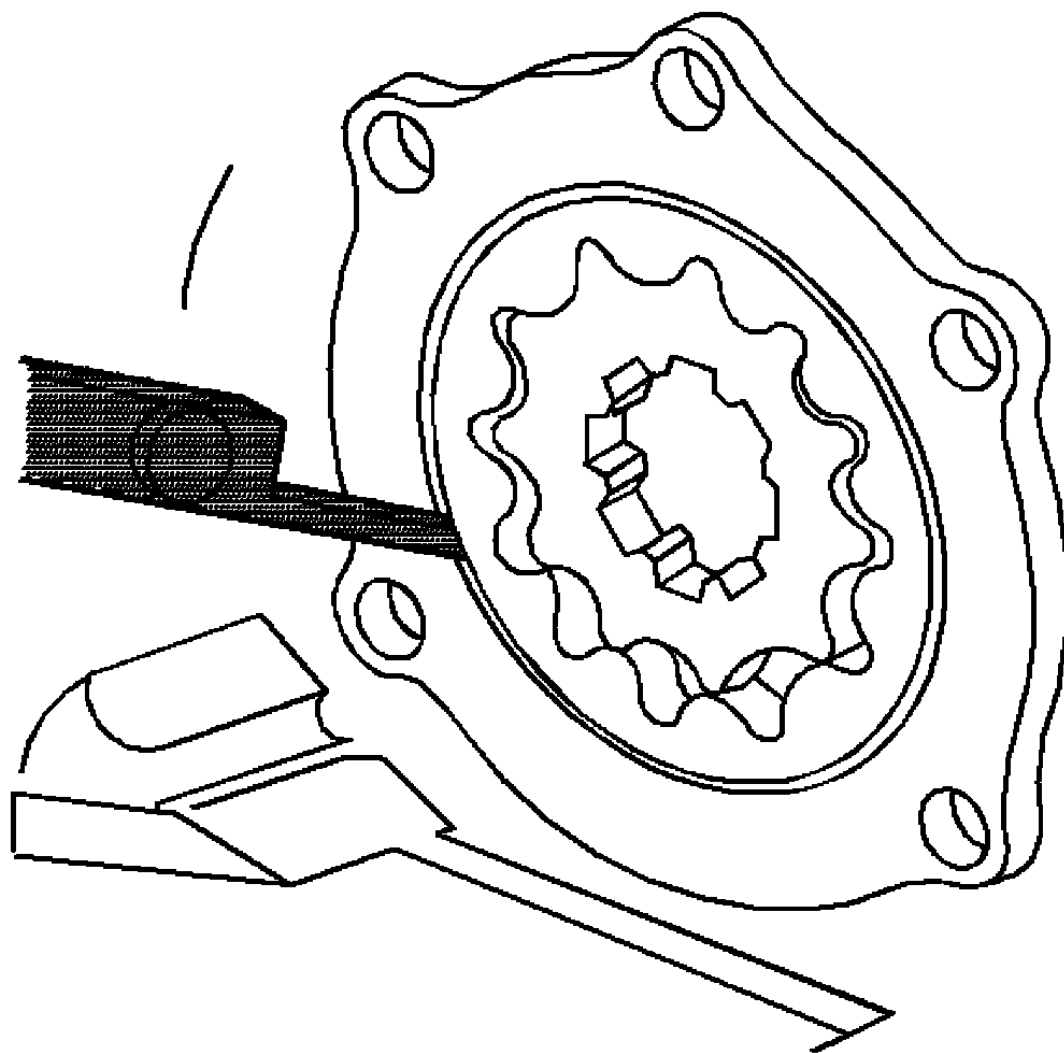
Measuring Outer Oil Pump Gear Diameter Clearance
